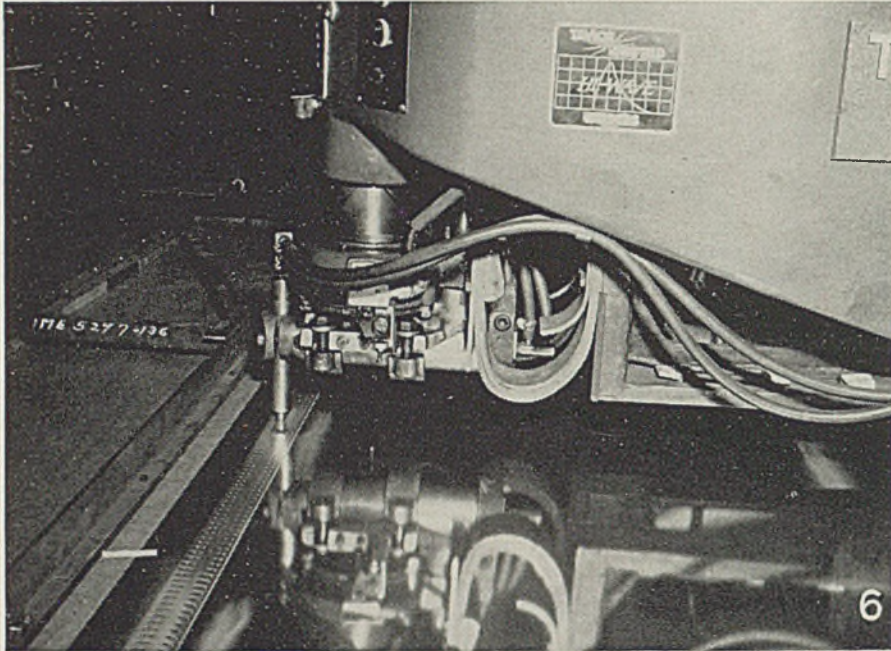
Closeup of welding head of equipment in Fig. 5, showing uniform spacing of rows of welds
